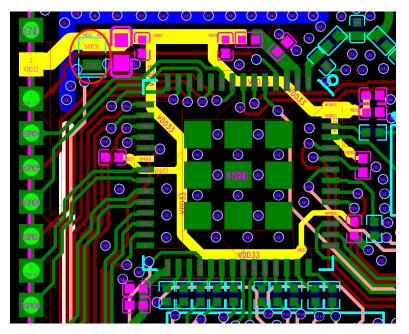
ESP32-S3 Power Traces in a Four-layer PCB Design
